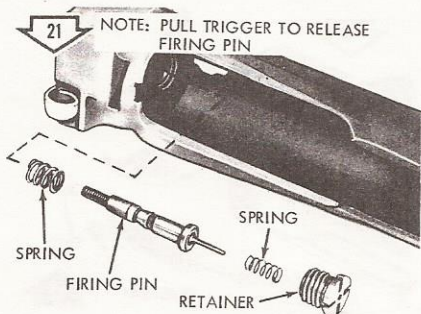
A. Disassembly/Assembly of Grenade Launcher. (Direct and General Support Maintenance)
